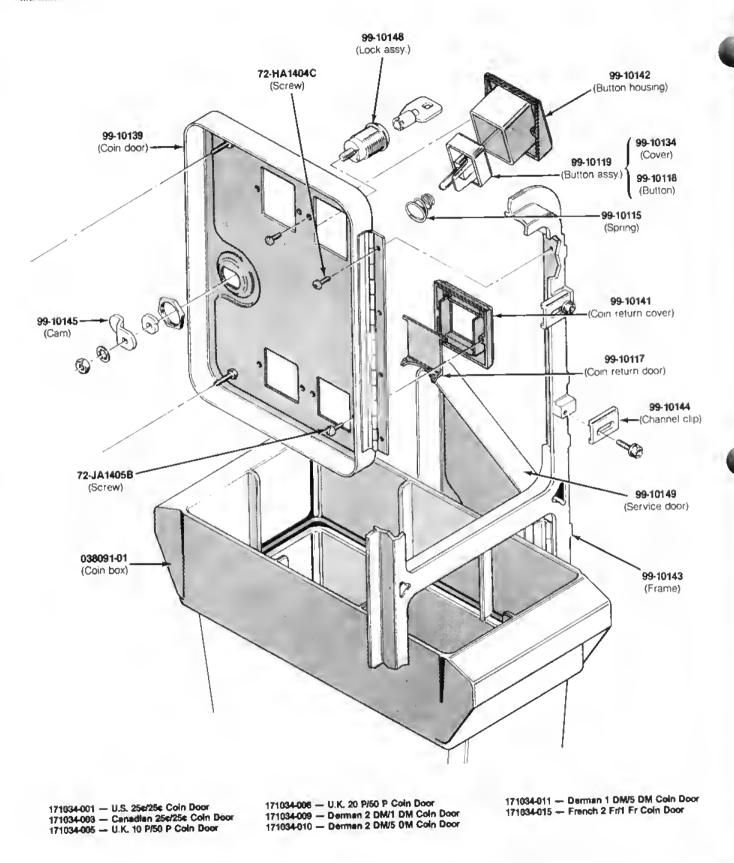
American-Made Coin Door Assembly, continued 171027-001 A
